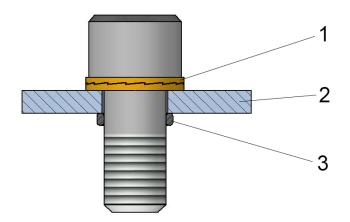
1...2 PART WASHER, 2... INDICATOR PLATE, 3... O-RING
